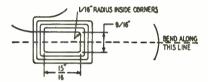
Winding details of the wobbler coils. Two identical windings as shown above are required. Spacing between turns in the drawing is only for clarification—coils are close-wound with No. 28 silk-covered wire and doped.
